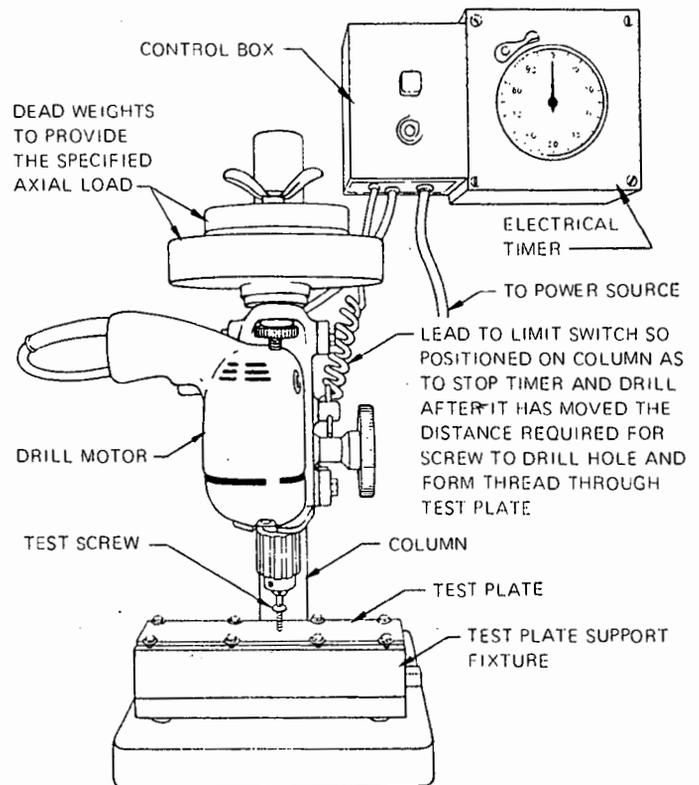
TYPICAL DRILL-DRIVE TEST FIXTURE
